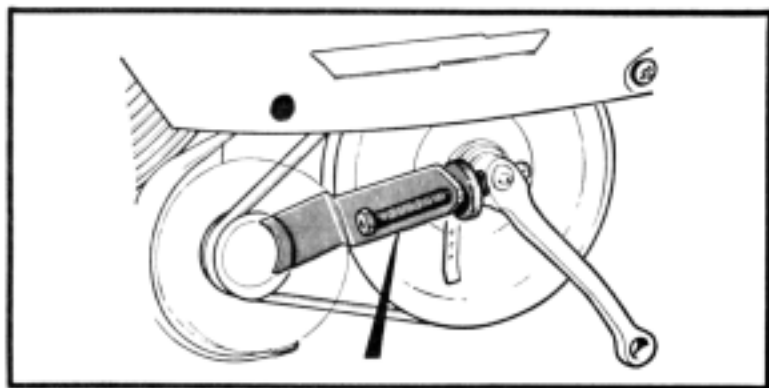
A tool like this is convenient when adjusting belts against spring tension.
